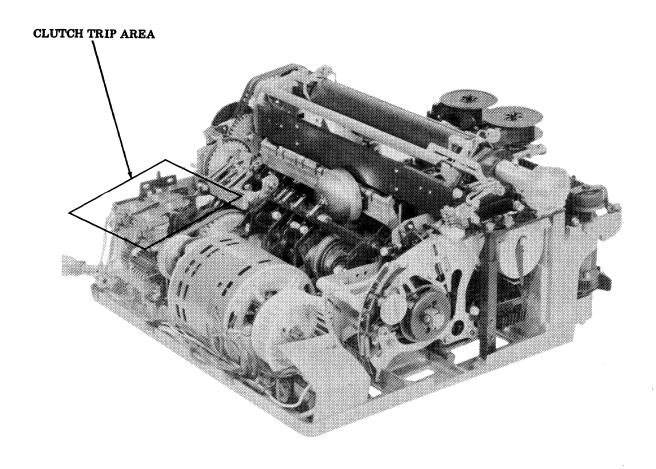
Clutch Trip Area (Without Reader Feed Magnet Contact Assembly)
